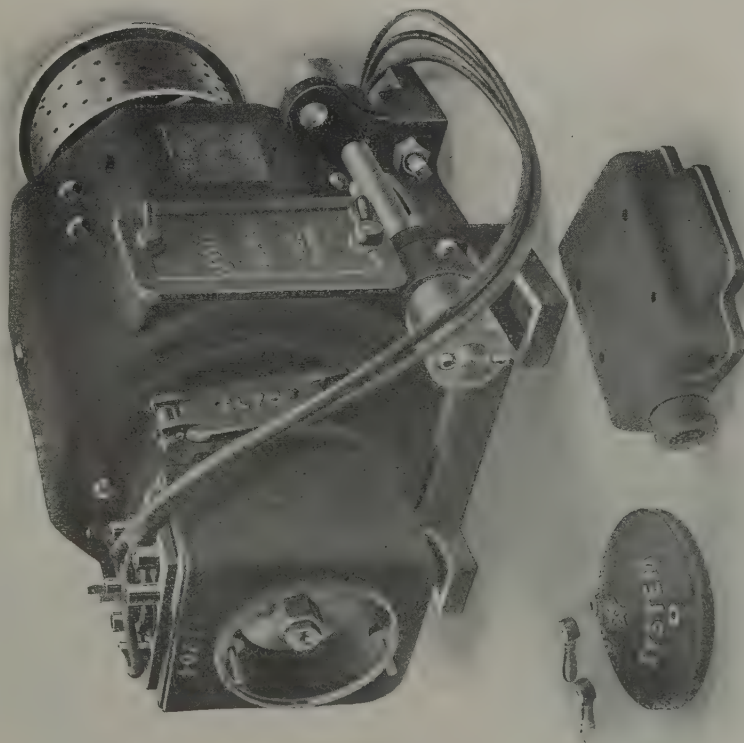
Plain Bearing, Waste Packed Generator, Showing Pole Changer Ready for Removal
